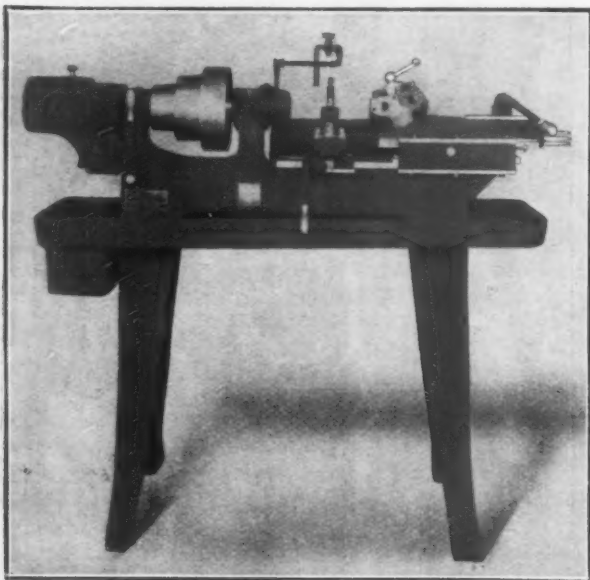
The No. 1 ($\frac{3}{4}$ -In.) Tilted Turret Screw Machine Built by the Wood Turret Machine Company, Brazil, Ind.
